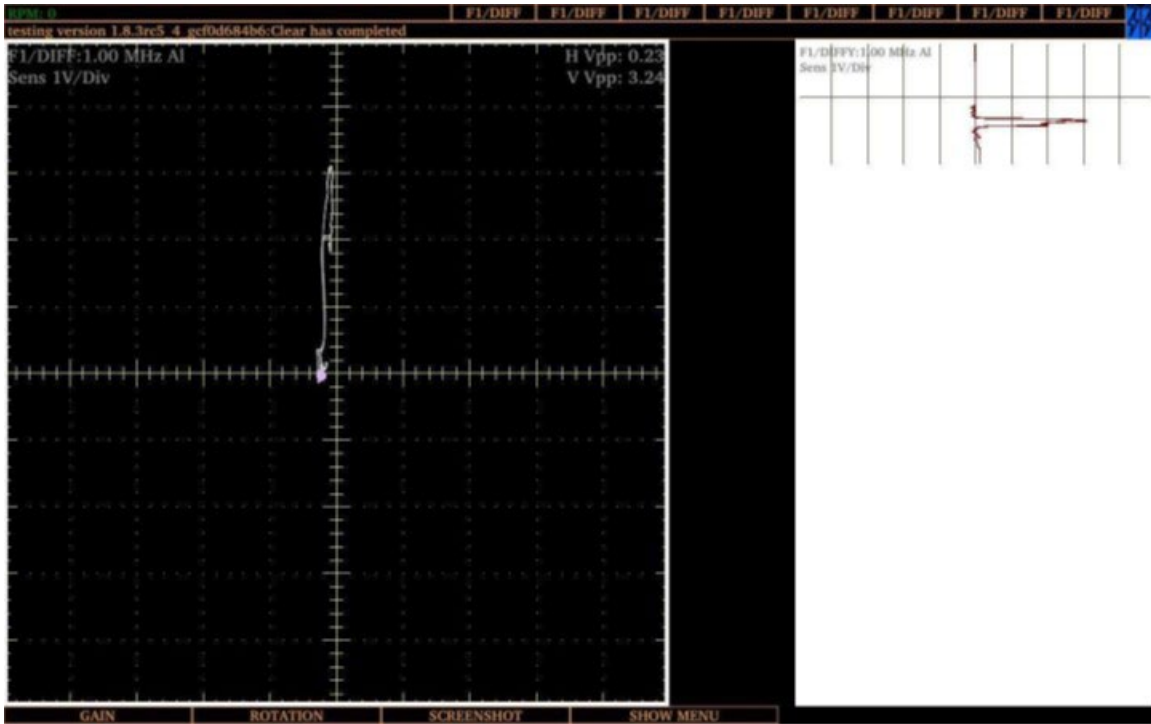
ET indication of defect at Location C in butt weld test panel TTCl-2
